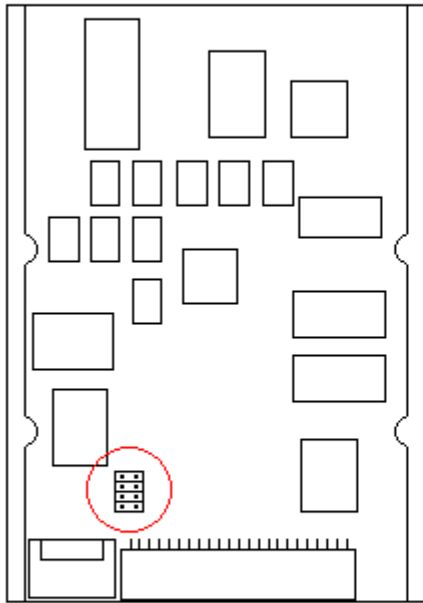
540 MB Quantum IDE Hard Drive Jumper Settings
